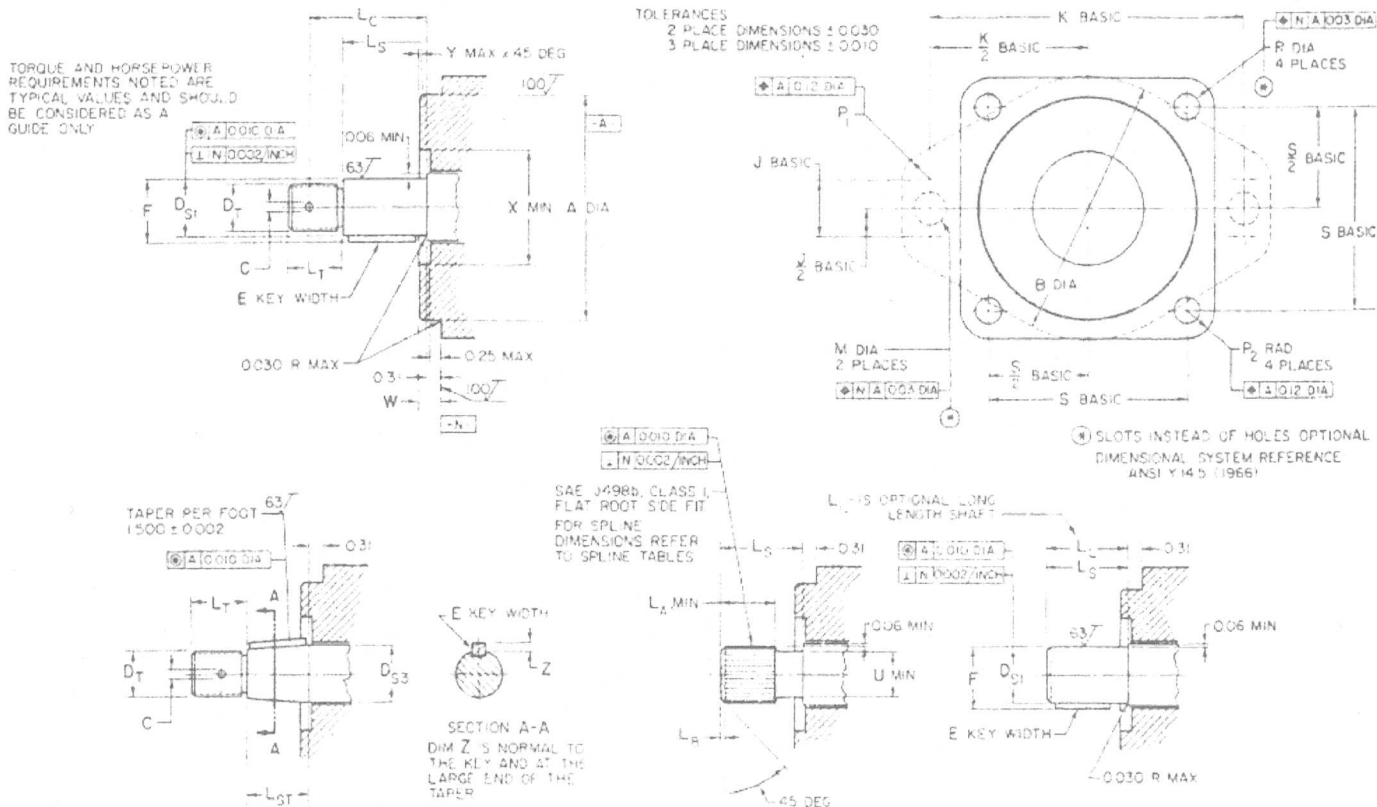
HYDRAULIC POWER PUMP AND MOTOR MOUNTING FLANGE AND SHAFT
